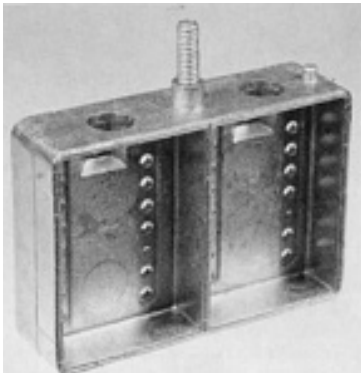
An injection-molded iron-nickel housing used in personal computers
